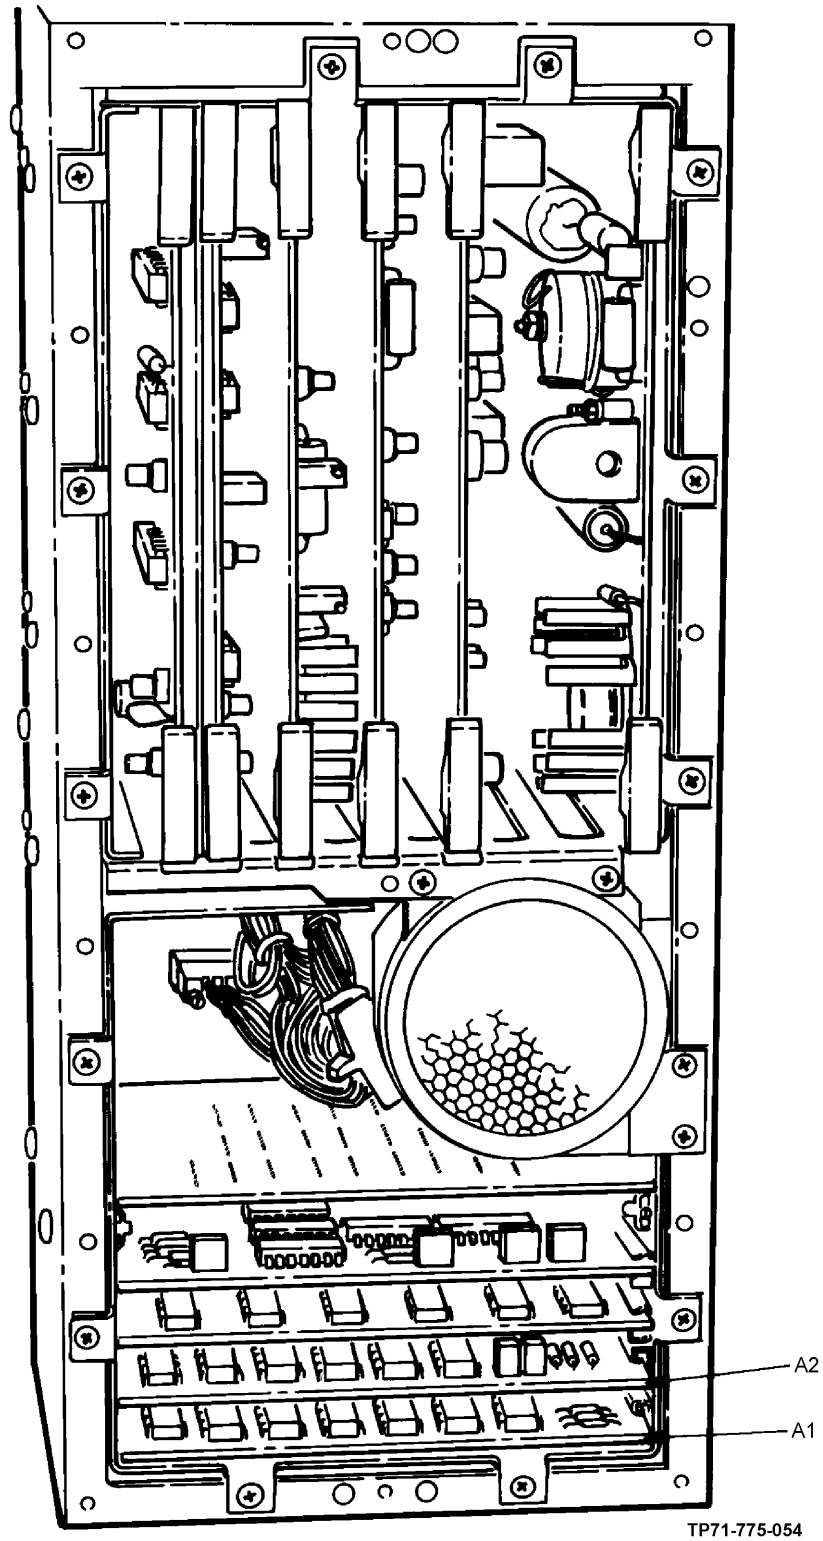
IVD Electronics Assembly CEM CCA Locations
